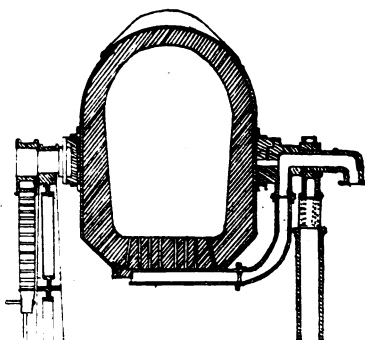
Cross-section of Bessemer converter, showing air pipe and tuyeres.
